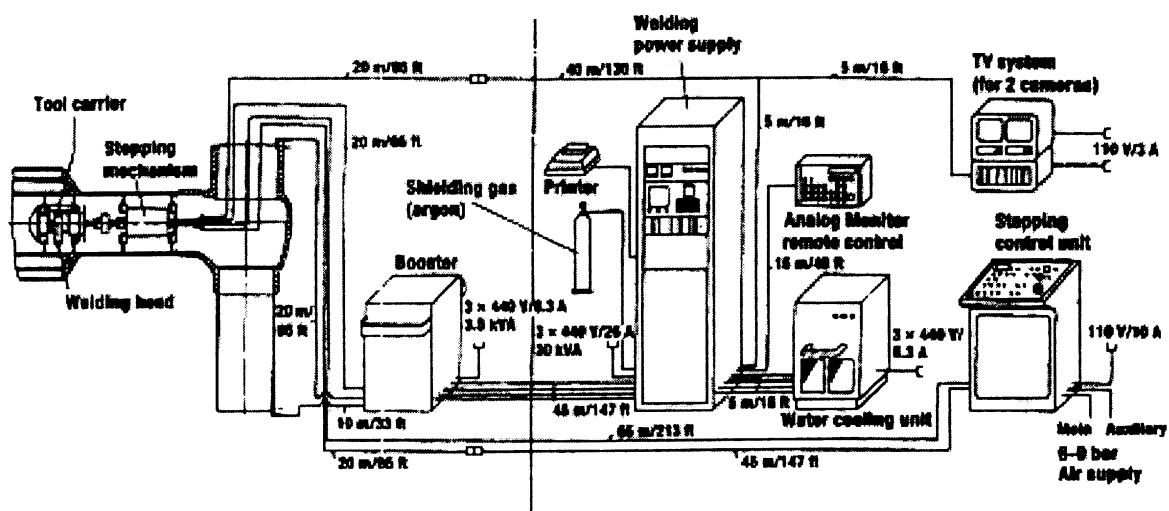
Equipment arrangement for in-pipe welding (sketch)
